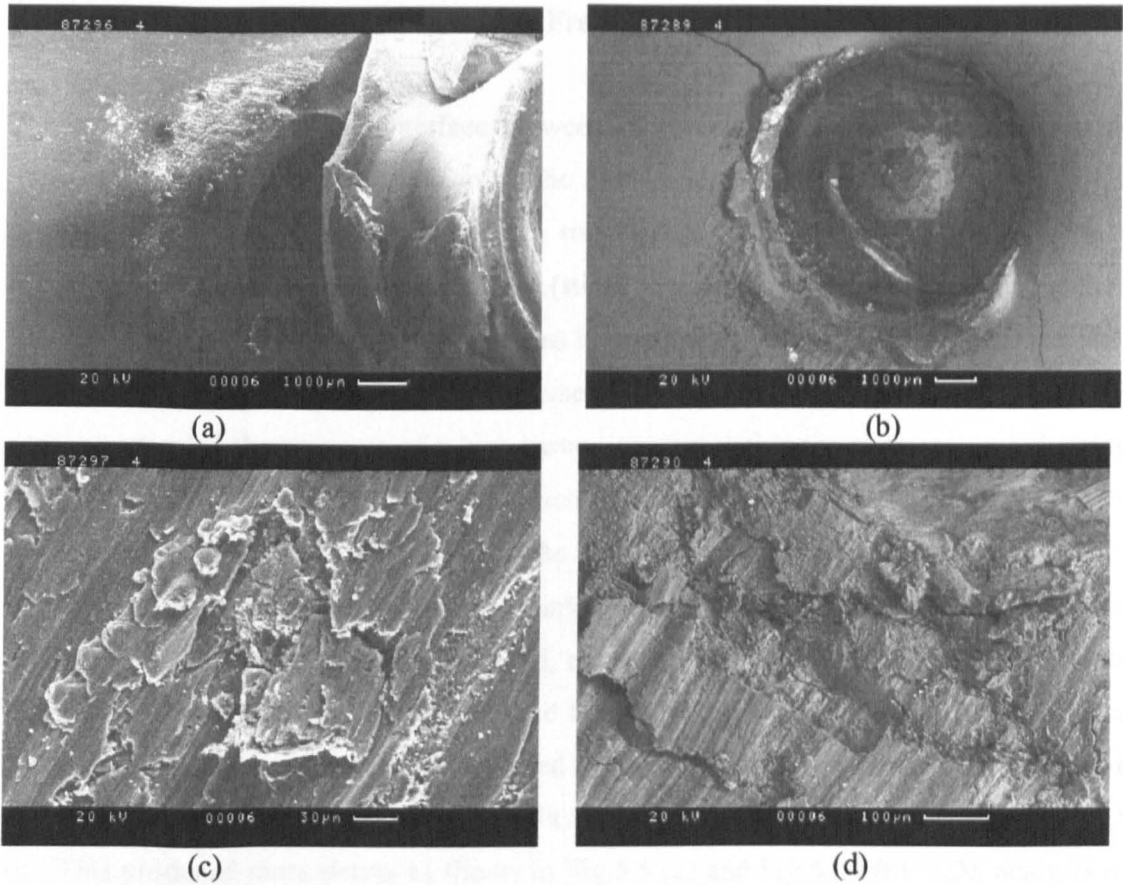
Contact surfaces of a FSH52 fastening after 97,890 cycles at 4.5kN, (a) fretting scars on the pierced sheet, (b) on the locked sheet, (c) damaged surface of the pierced sheet, (d) damaged surface of the locked sheet.
